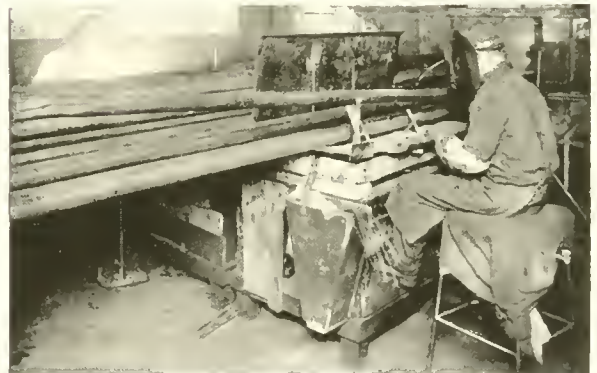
Welding defects in steel tubes with an electro-a welder.
